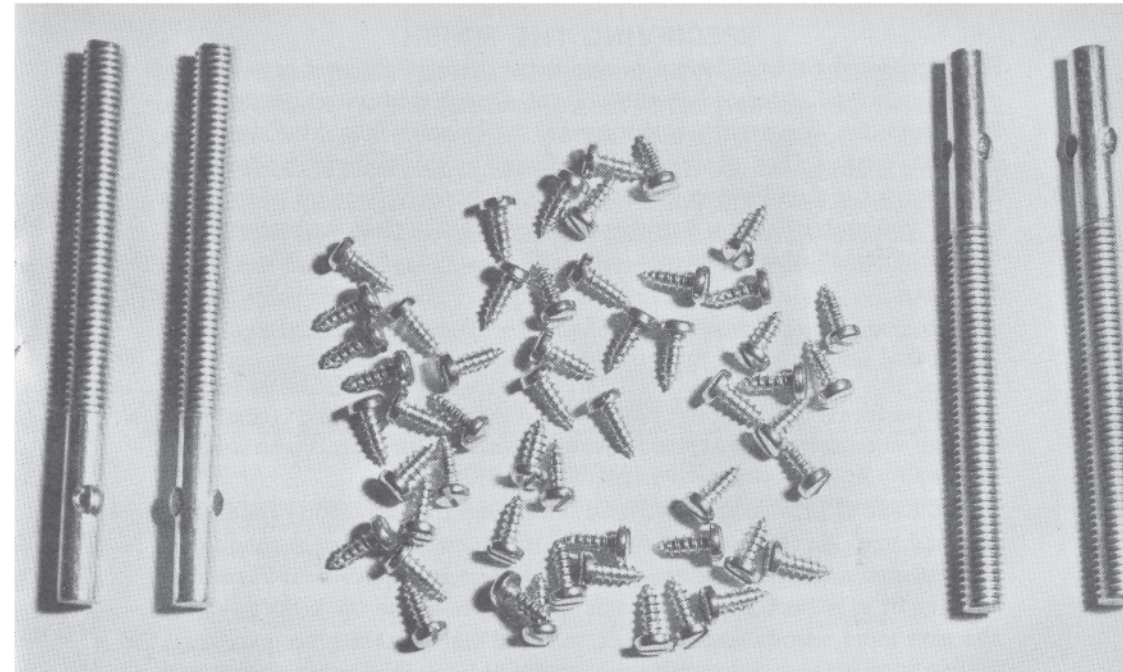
Illustration F – Zinc plated screws and bolts with clear chromate coating.
